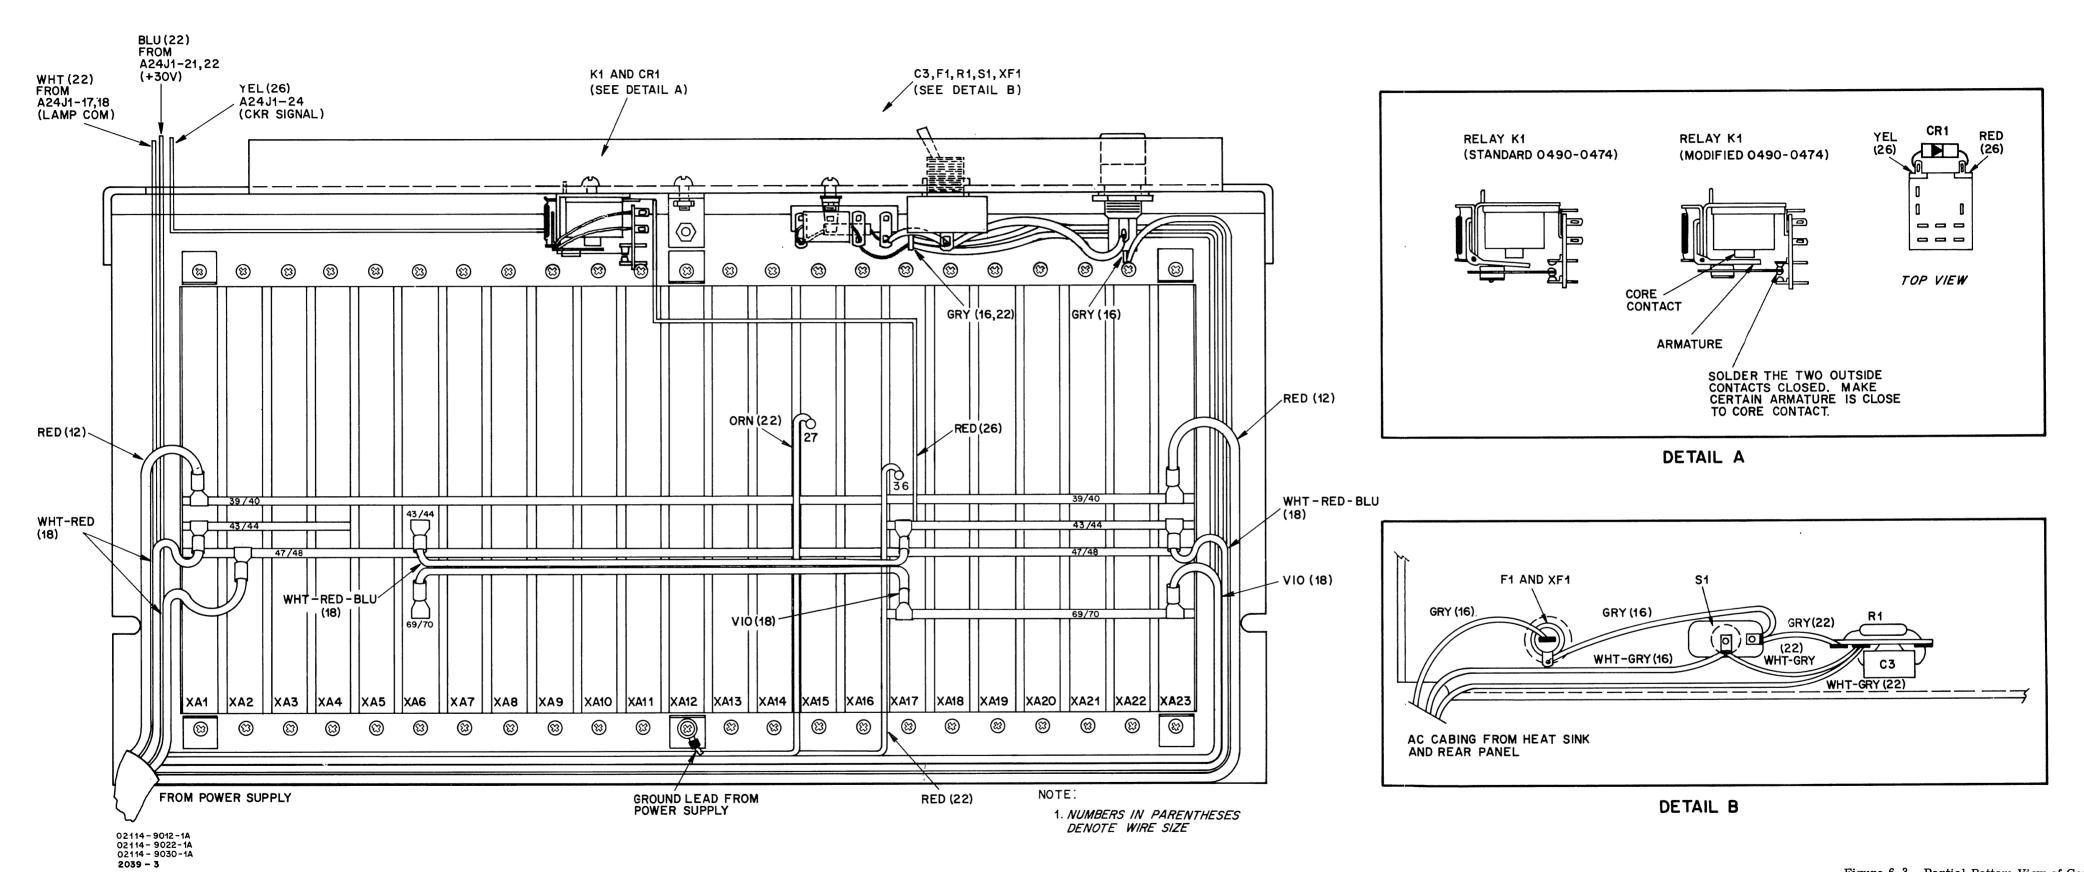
Partial Bottom View of Computer Showing Backplane Assembly (02114-6022) and Chassis Mounted Parts, Part Location and Wiring Diagram
